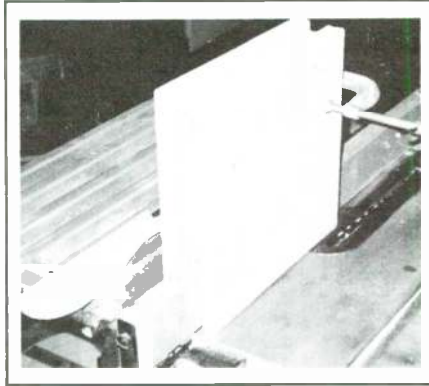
Jig on a table saw for cutting edge angles. The middle board is 1/16" thicker than rip fence. Clamp the board to the jig.
